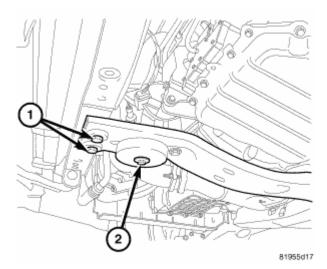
Identifying Engine Mount/Cross Member Courtesy of CHRYSLER LLC
